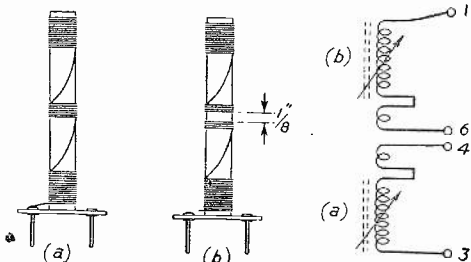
Details of the I.F. coils. (a) and (b) windings are identical.
